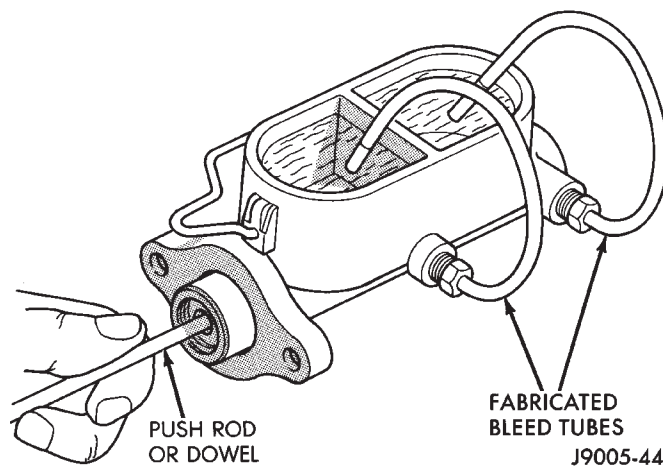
Typical Method Of Bleeding Master Cylinder (One-Piece Cylinder Shown)
